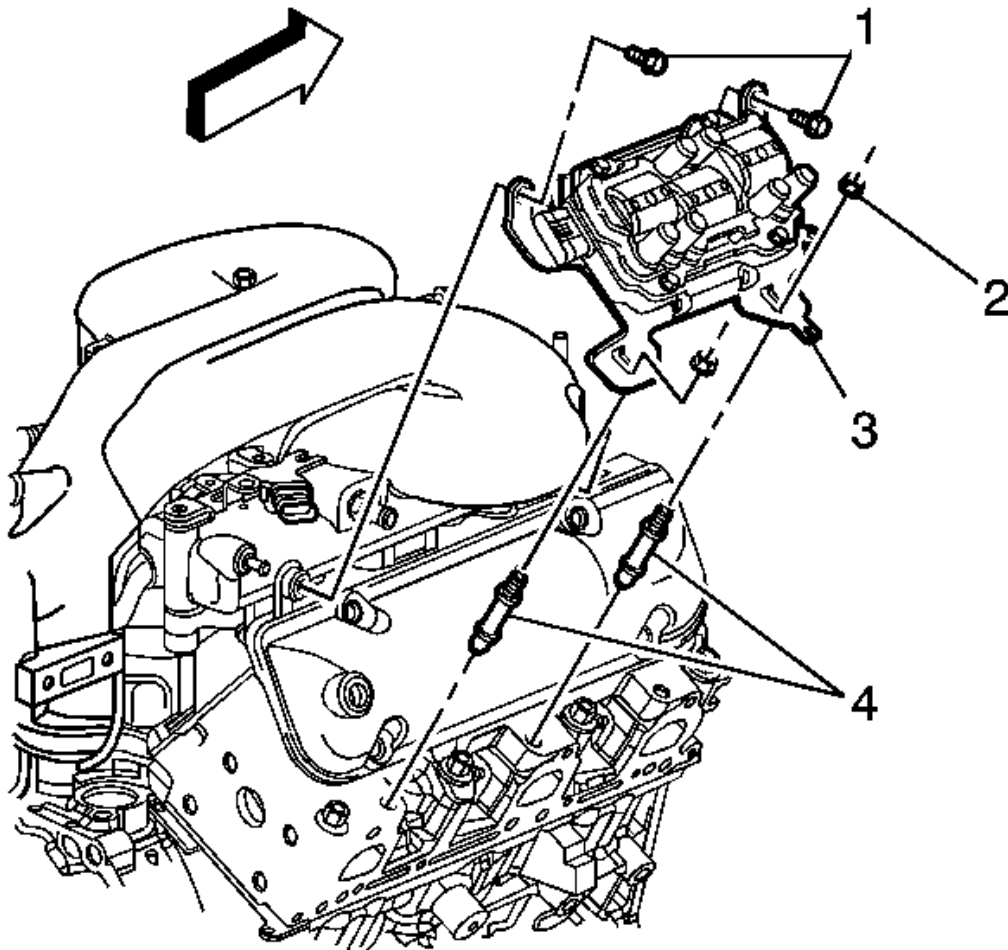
Ignition Coil, Bracket Bolts & Nuts
